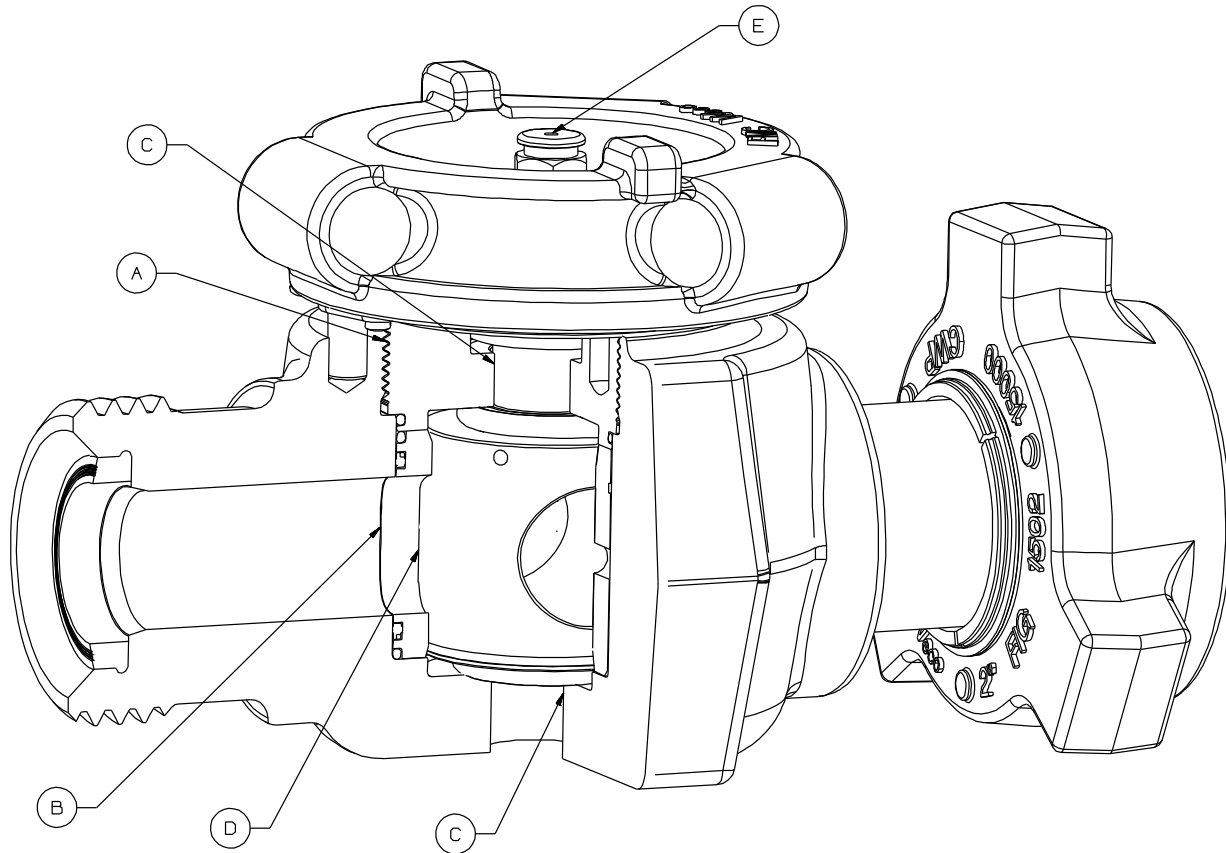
Possible Leak Paths in 2" ULT Plug Valve
